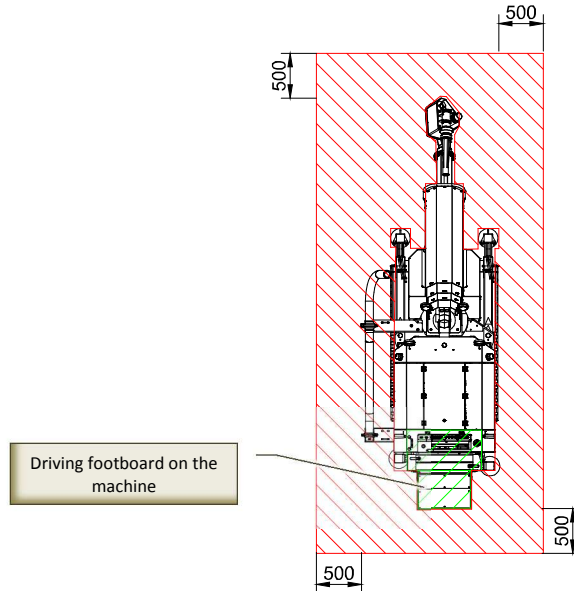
Operator zones and danger zones during machine movement (plan view)
